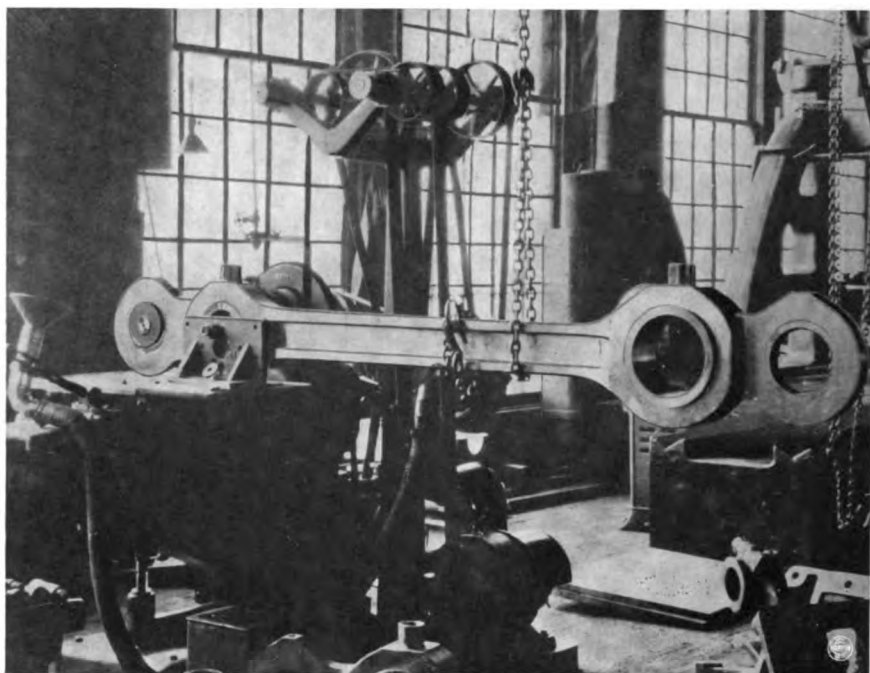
Grinding Hardened Steel Bushing in Knuckle Joint Pinhole of Locomotive Side Rod
